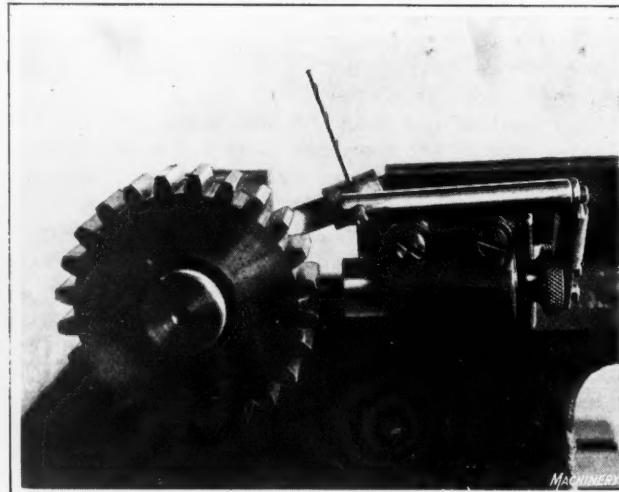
Opposite Side of Fixture shown in Fig. 3, with Attachment for Gear-testing in Position
